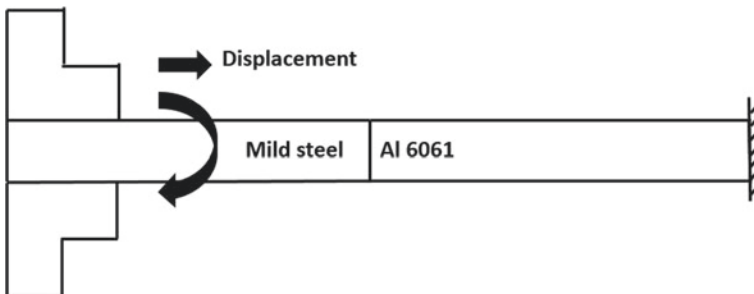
Schematic of rotary friction welding of Al 6061 and mild steel
